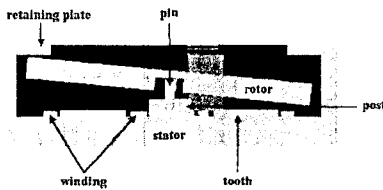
cross-sectional views of the magnetostatic wobble motor
